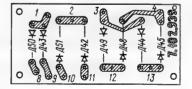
Layout of Adjustment Elements and Printed-Circuit Board (Side View)
